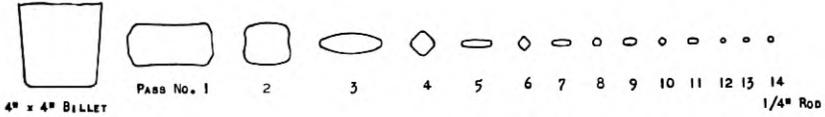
Rod mill reductions—4 in. by 4 in. billet to 1/4 in. rod
